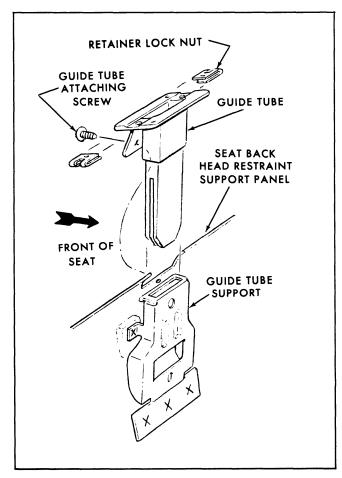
Head Restraint Guide Tube Typical of All Conventional Seats
